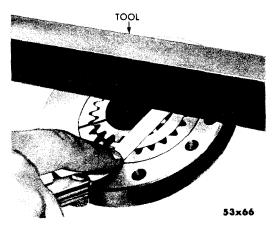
Checking Clearance between Oil Pump Body and Gears (Tool C-3335)
